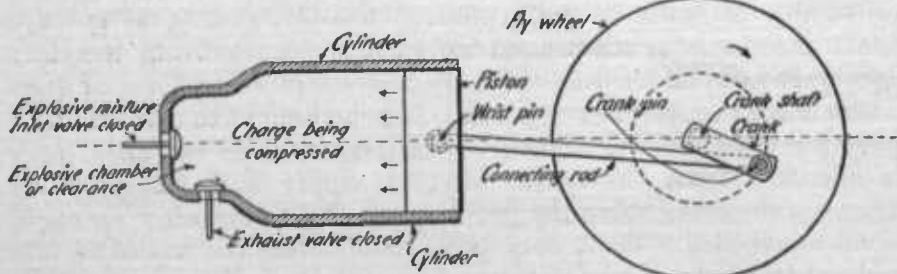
Diagram showing mechanism of internal combustion engine—compression stroke.
